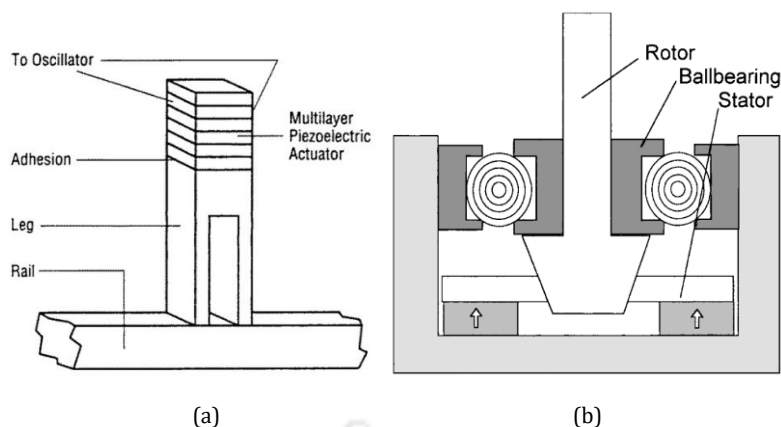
(a) π -shaped linear motor (b) Windmill motor
